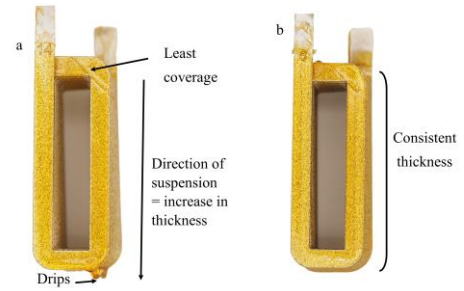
End product of the dip coated windings a. vertically suspended (HT2, 45 min.), b.- using the clamp fixture (HT1, 45 min. EP)
